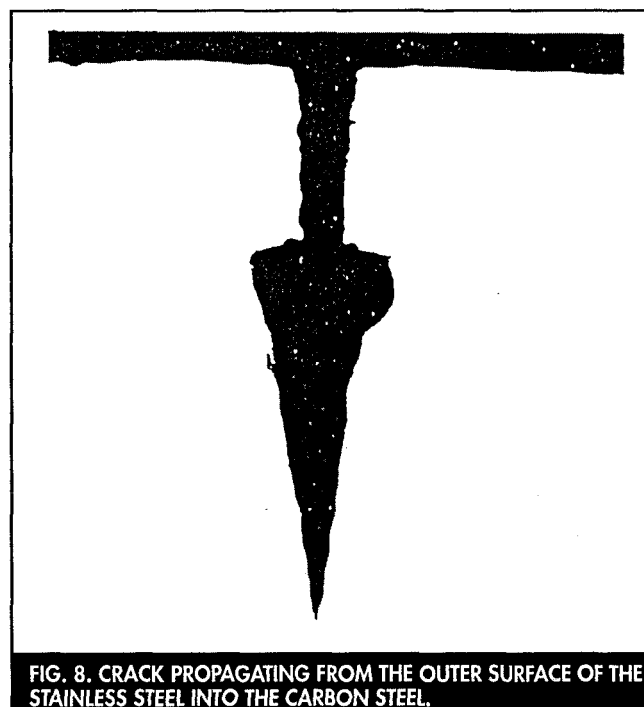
CRACK PROPAGATING FROM THE OUTER SURFACE OF THE STAINLESS STEEL INTO THE CARBON STEEL.
